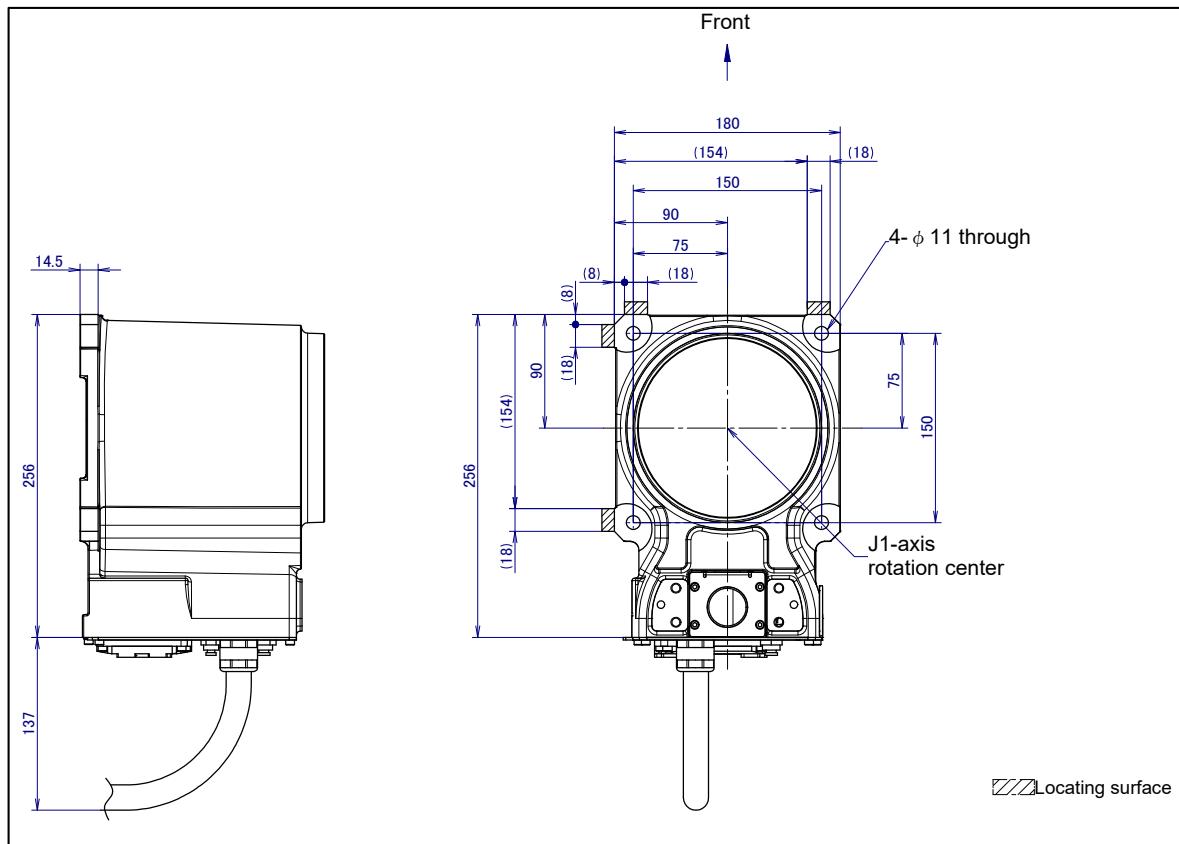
(b) Dimensions of the robot base (back side connector plate) (SR-6iA, SR-6iA/H, SR-6iA/C)
